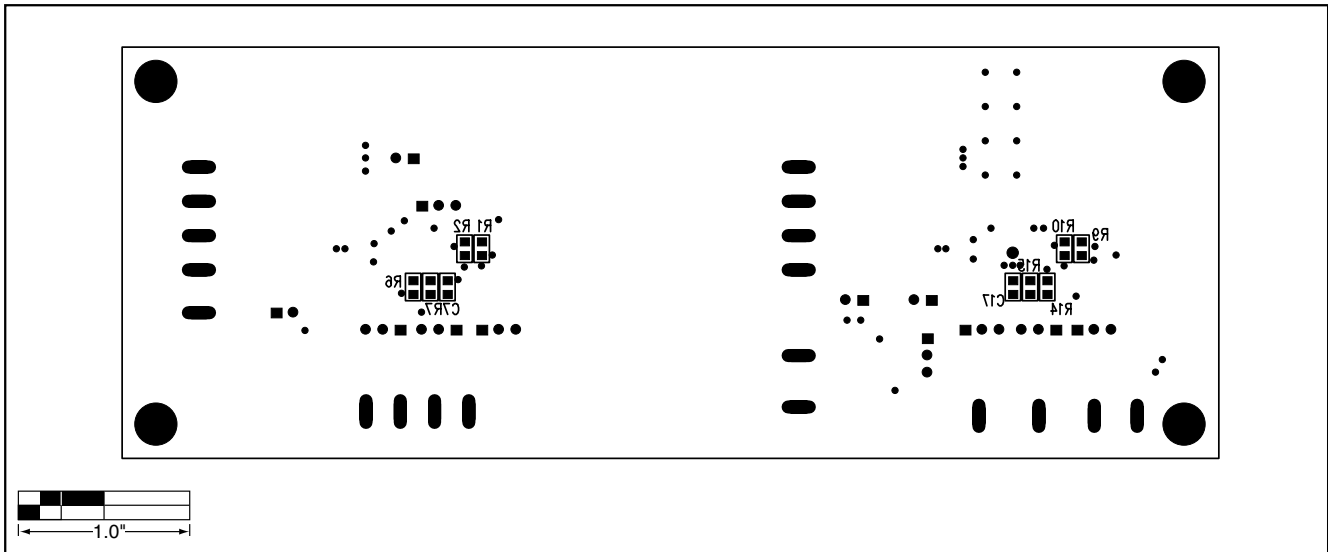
MAX1763 EV Kit Component Placement Guide—Solder Side
